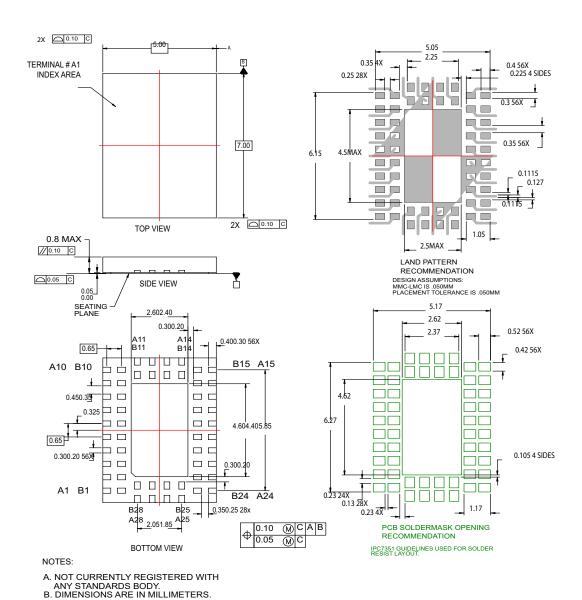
56-Lead Molded Leadless Package (MLP) 5x7mm
